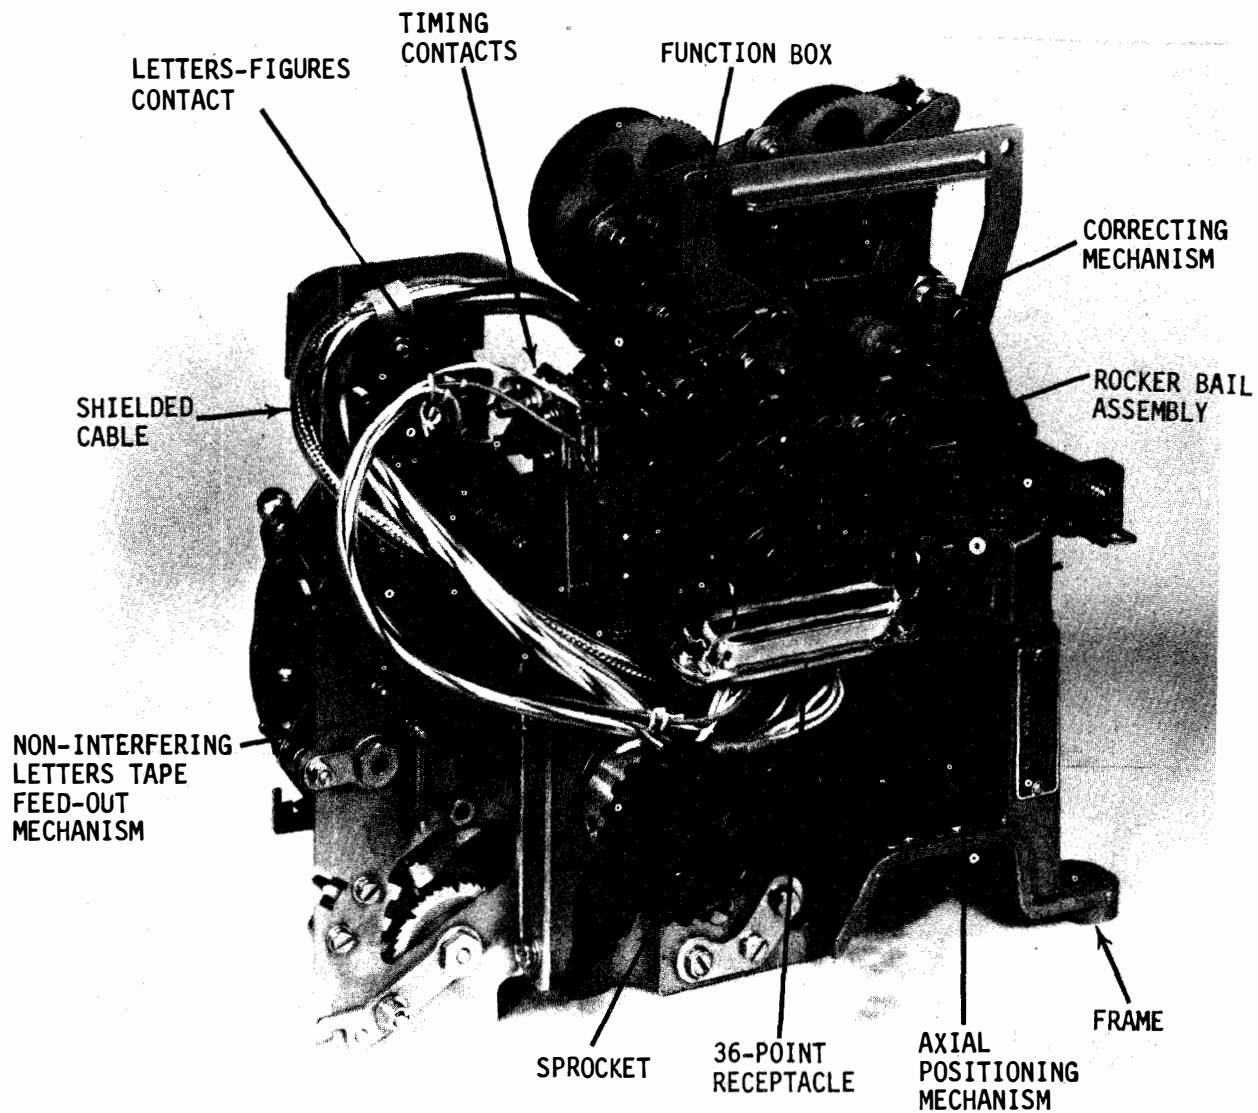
Typing Reperforator Unit Model 28 (Fully Perforated Tape), Front View
